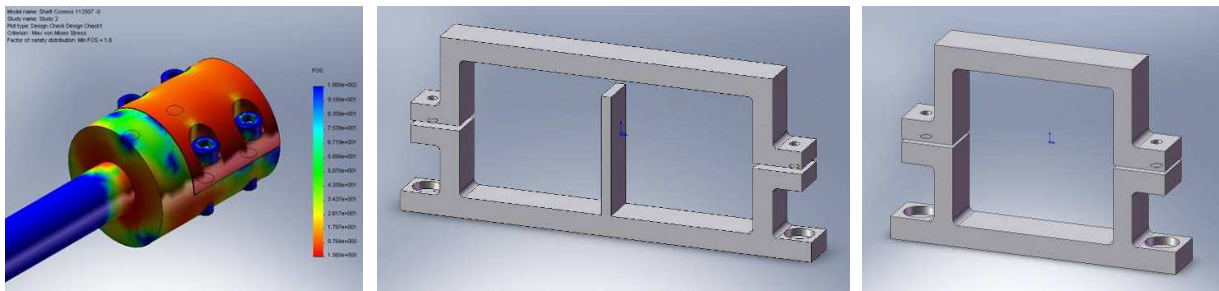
SolidWorks rendering of coupler shaft (left) and motor mounts (middle and right).
